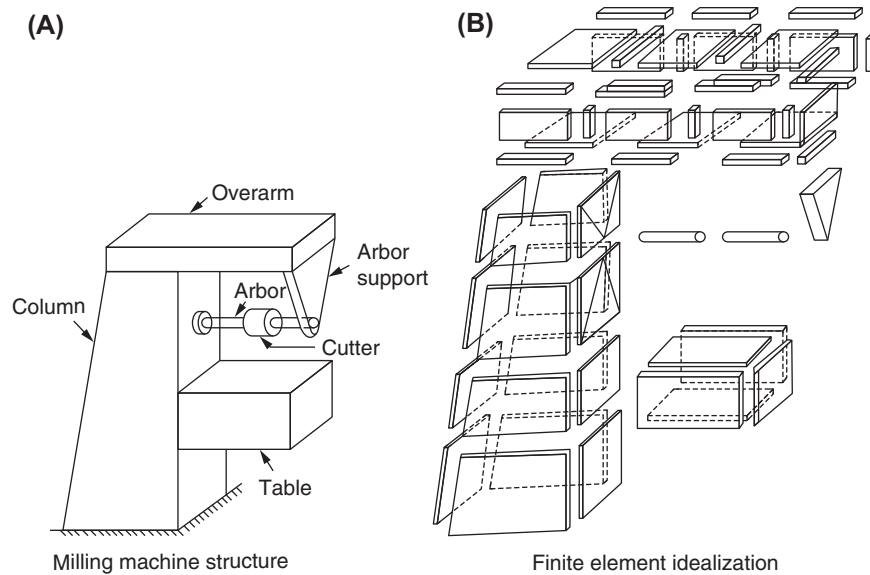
Representation of a milling machine structure by finite elements.
